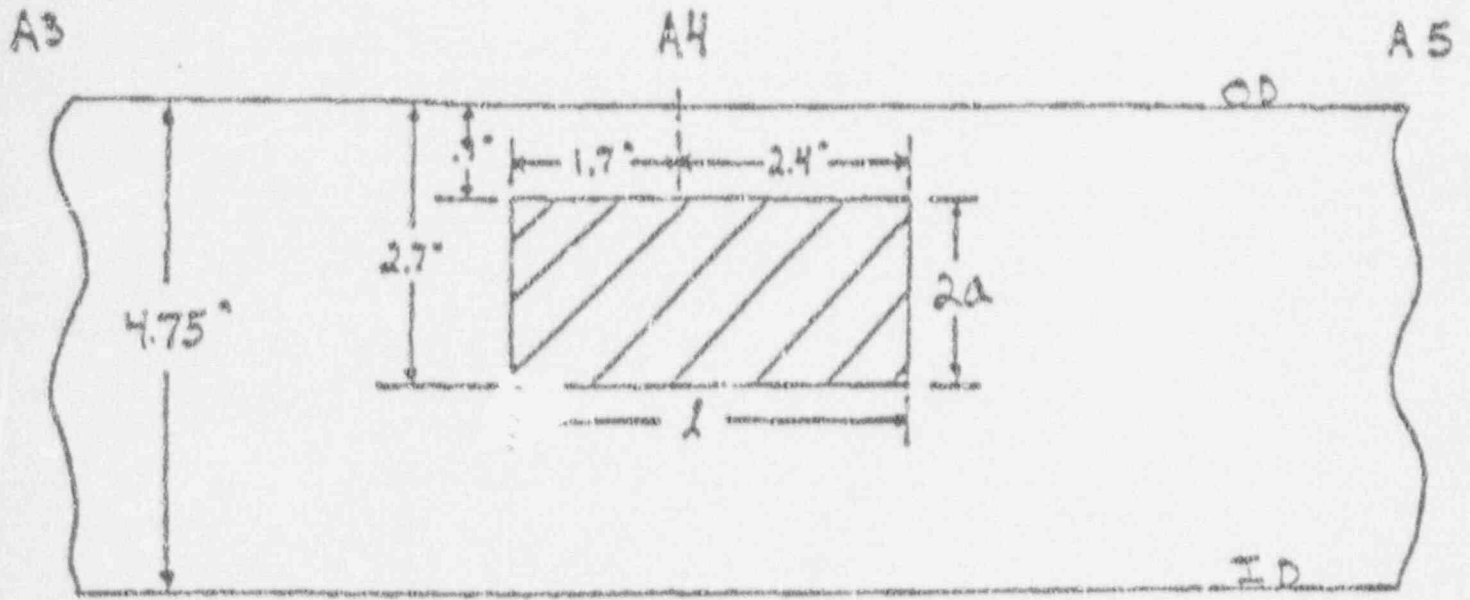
Byron-Jackson Reactor Coolant Pump Weld and Base Material Thickness Lower Scroll Weld Flaw Indications ANO-1 "B" RCP 1988 UT Exam
